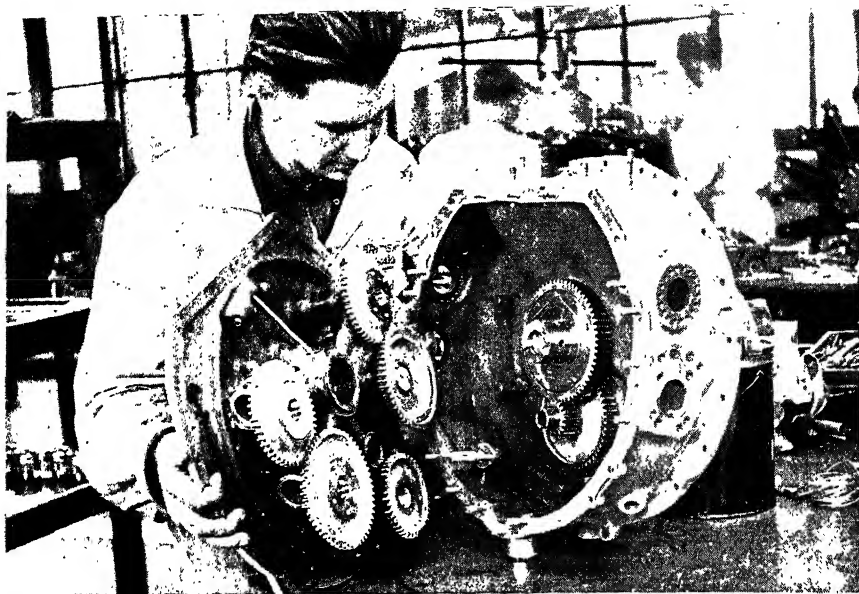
FITTING REAR COVER TO SUPERCHARGER REAR HOUSING
